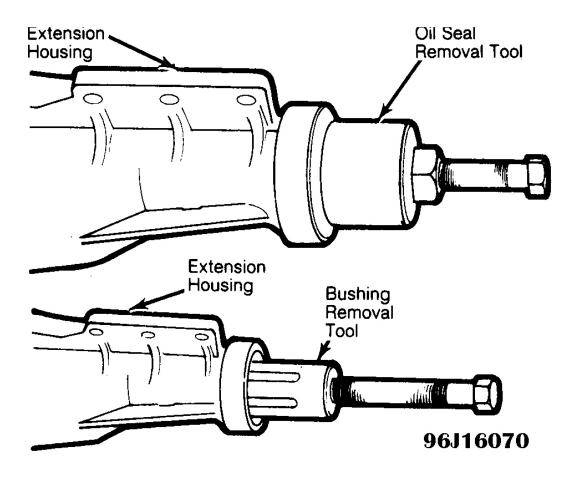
Removing Extension Housing Oil Seal & Bushing Courtesy of FORD MOTOR CO.
